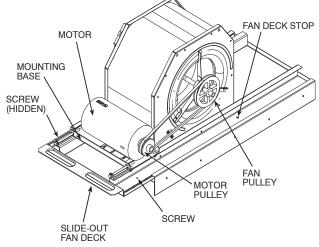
Evaporator-Fan Motor Adjustment (Sizes 08-14 Shown)
